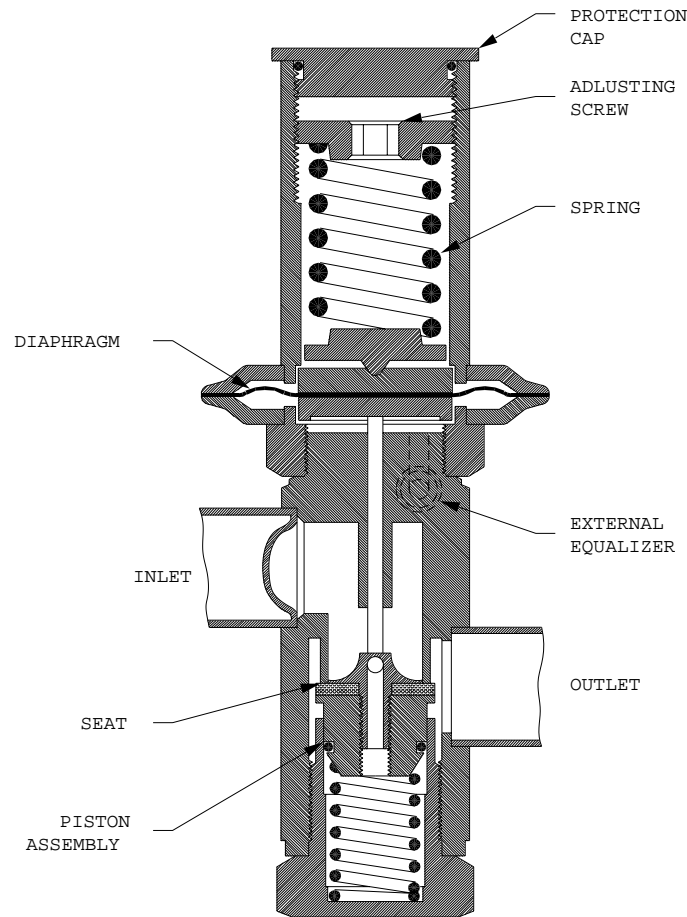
Cross sectional view of a hot gas bypass pressure regulating valve.
